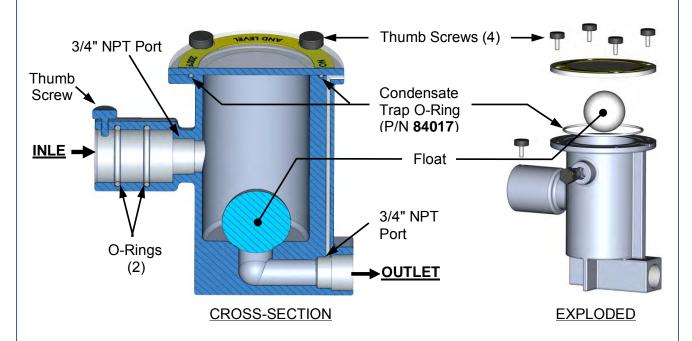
External Condensate Trap – Cross-Section & Exploded View
